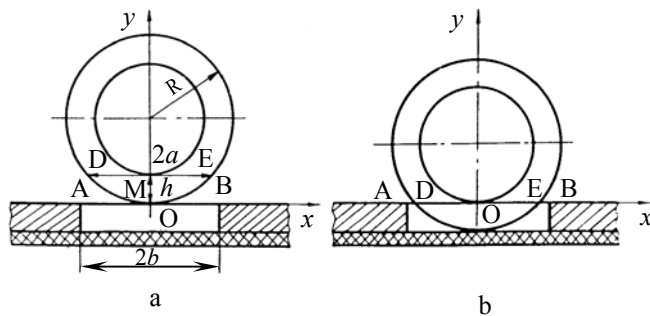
Charts of the part falling into the holes of horizontally oscillating stencil: a - prior to the part falling; b - after the part falling into the hole
